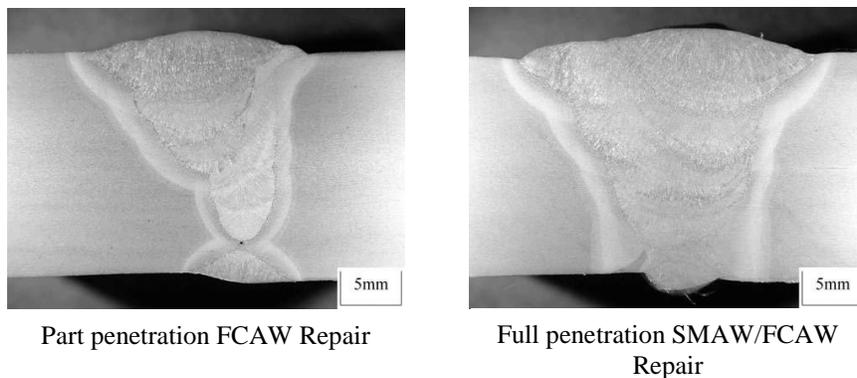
Multi-pass Weld Repair Macro Sections
